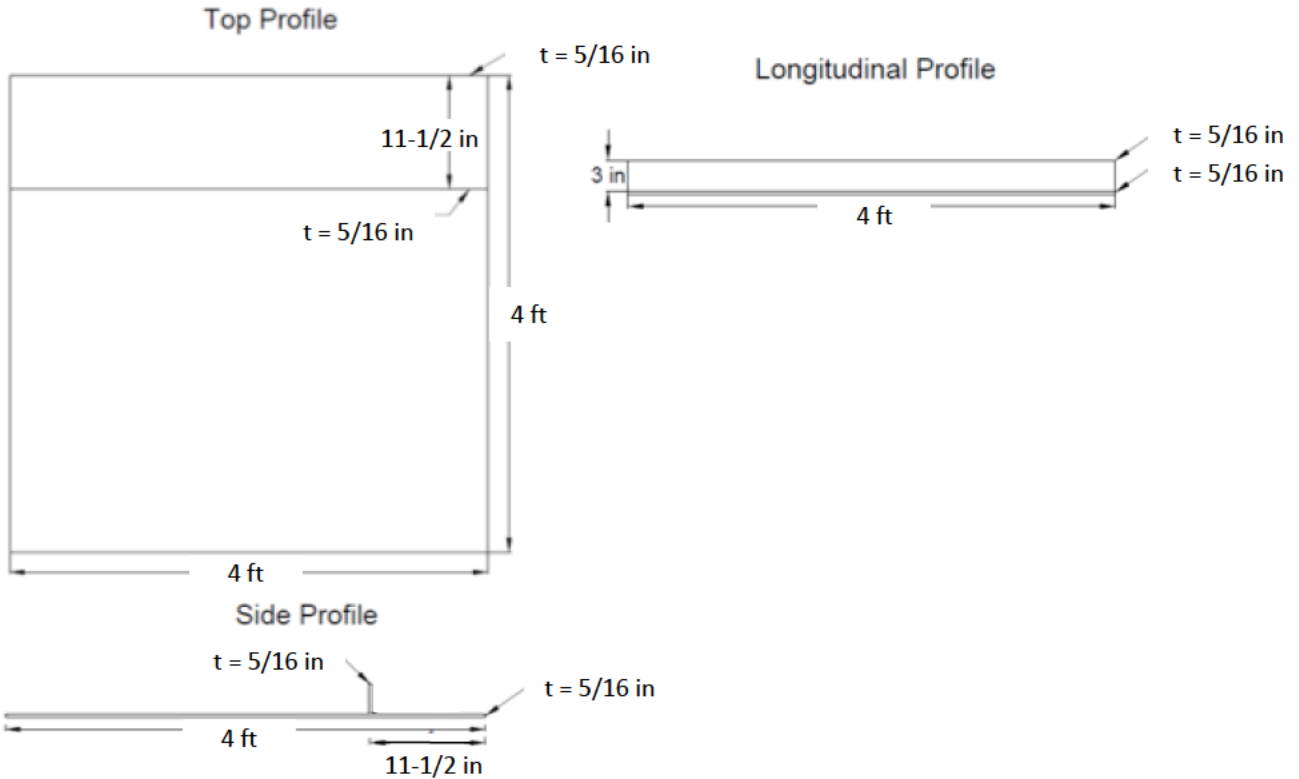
Overall square specimen configuration, showing fillet-welded flat bar 11.5" (292mm) from the end. 5/16" (7.9mm) continuous weld version is shown.
